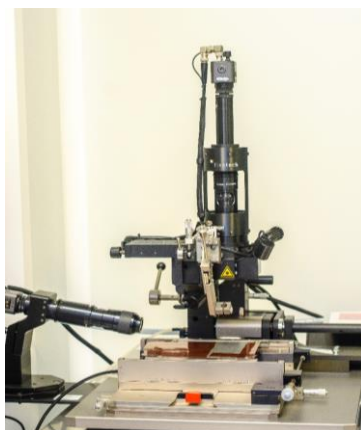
Pick and place machine for linear triplet assembly in IFAE, Barcelona.
